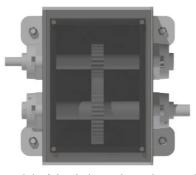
3D model of the dedicated gearbox module with a gear ratio of 1.42 – top view
